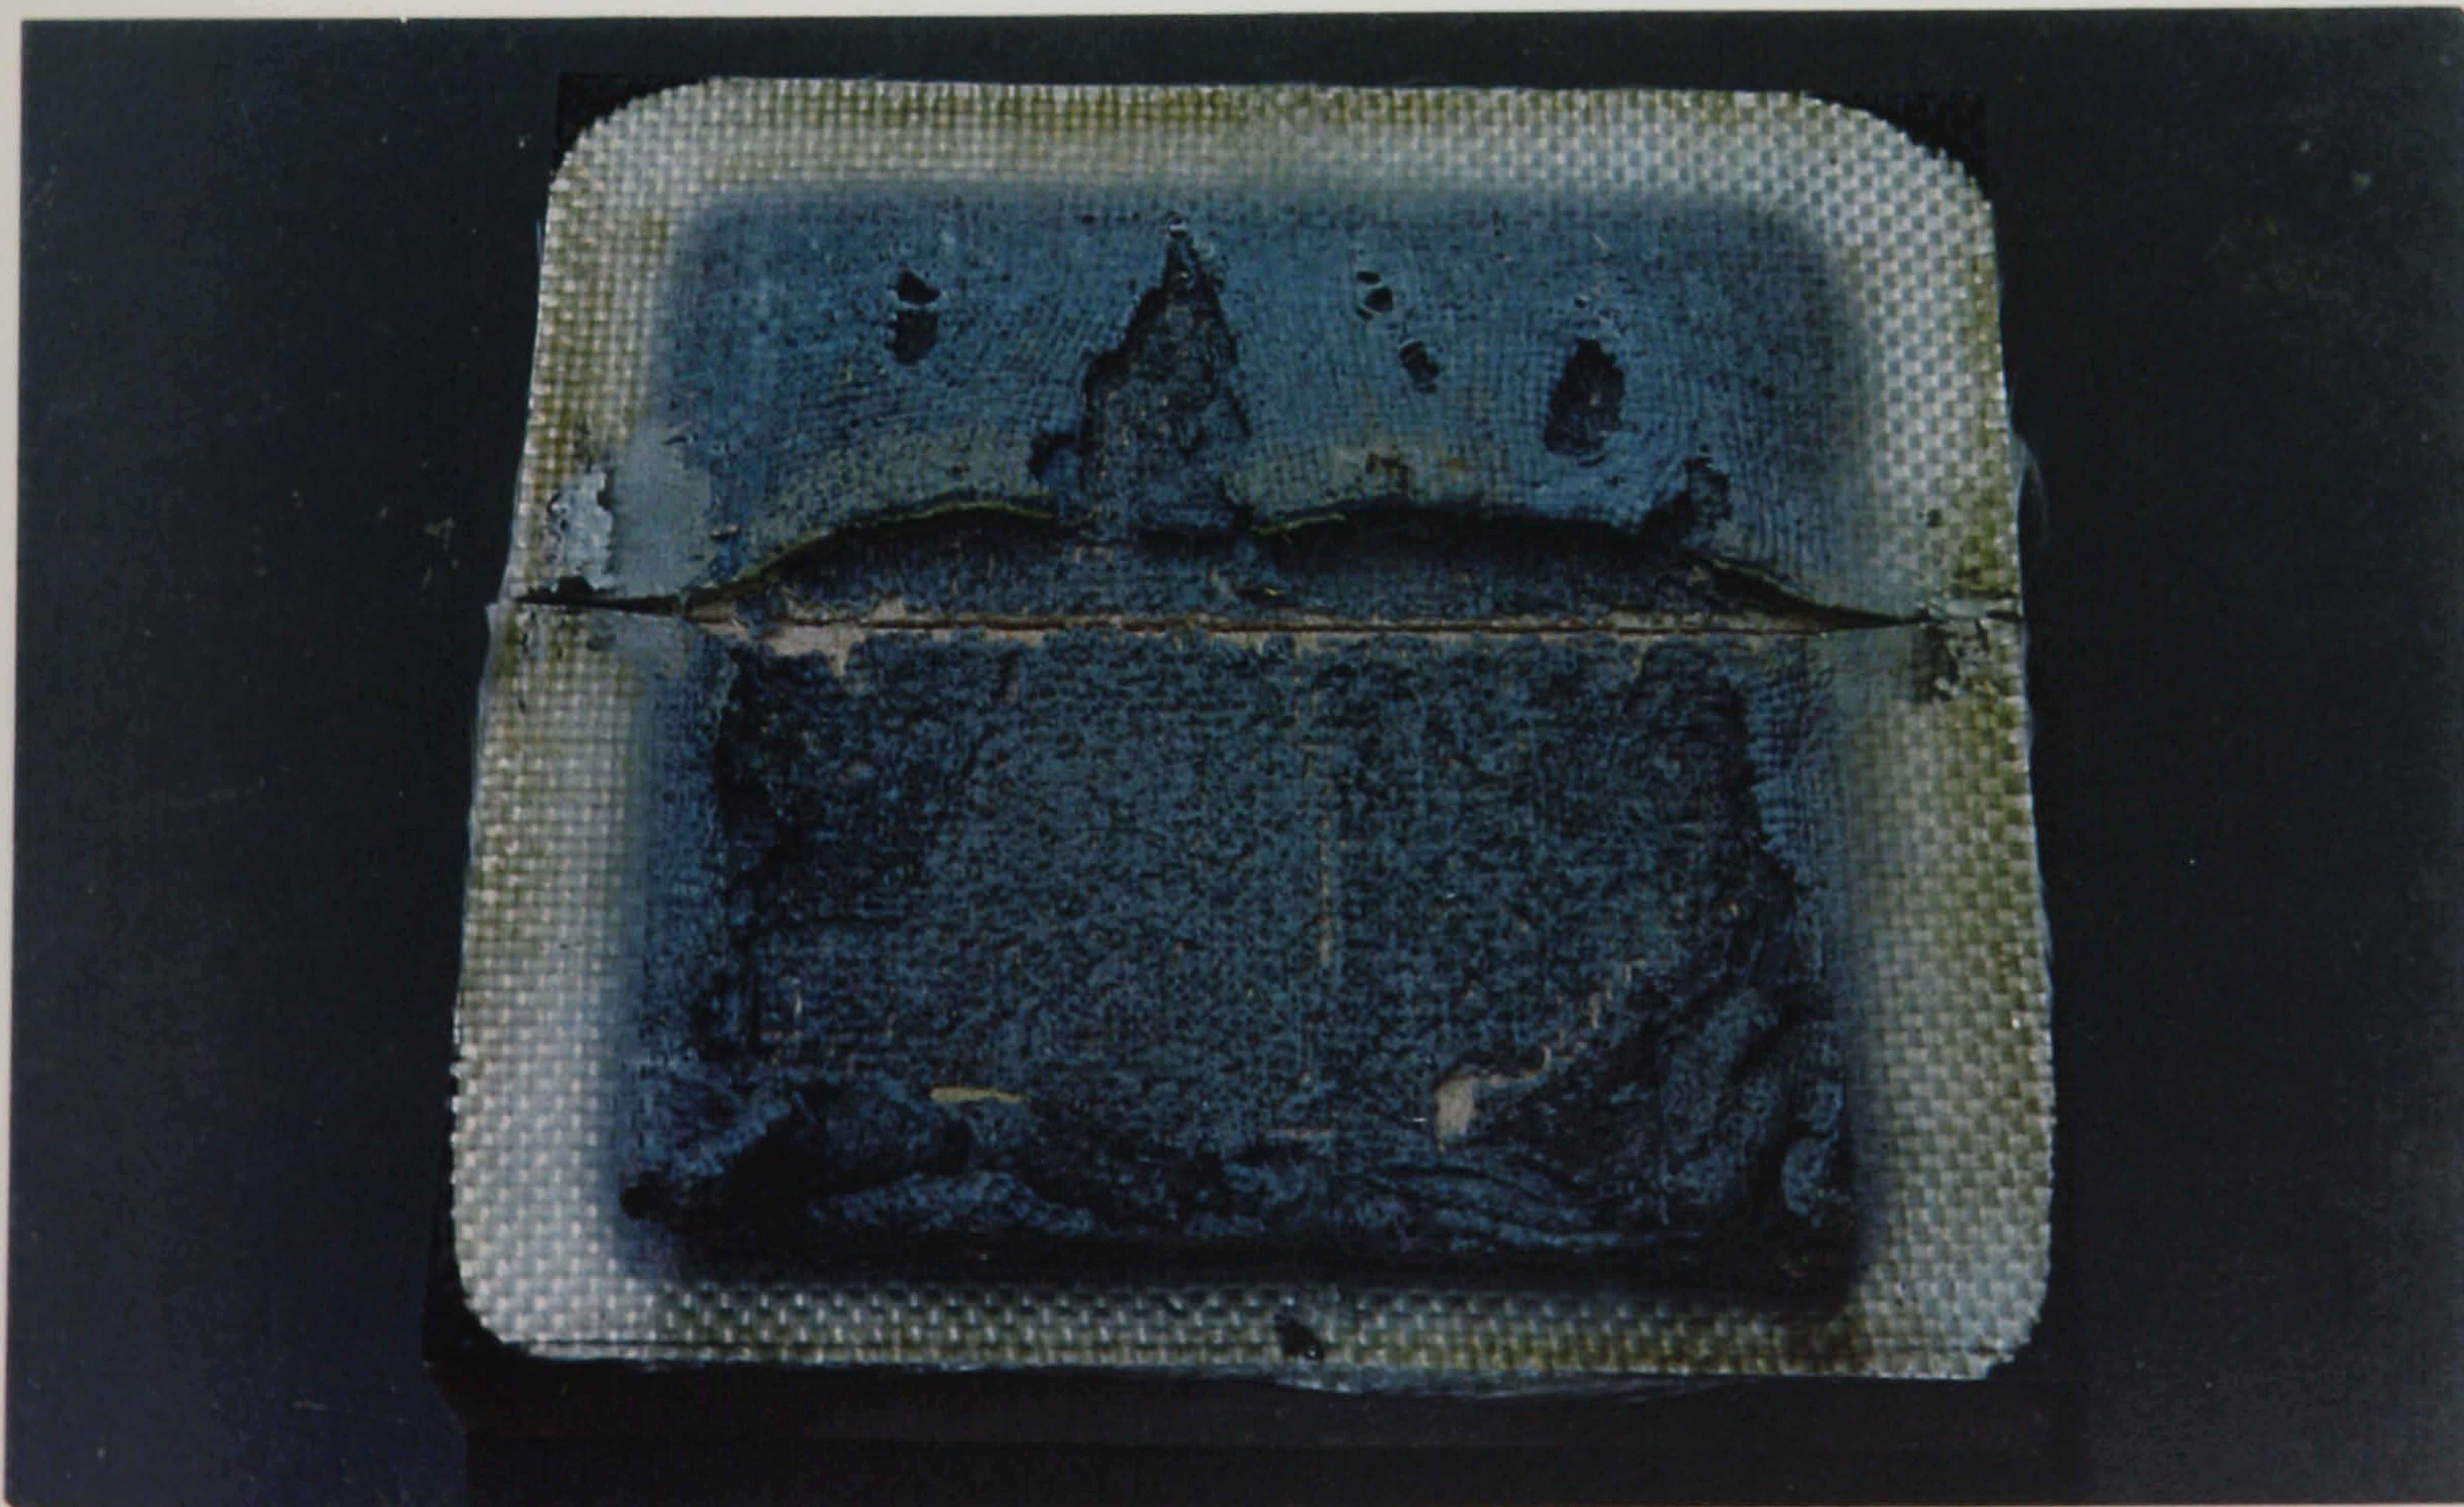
Post Test Condition of Lap Jointed Sandwich Panel
